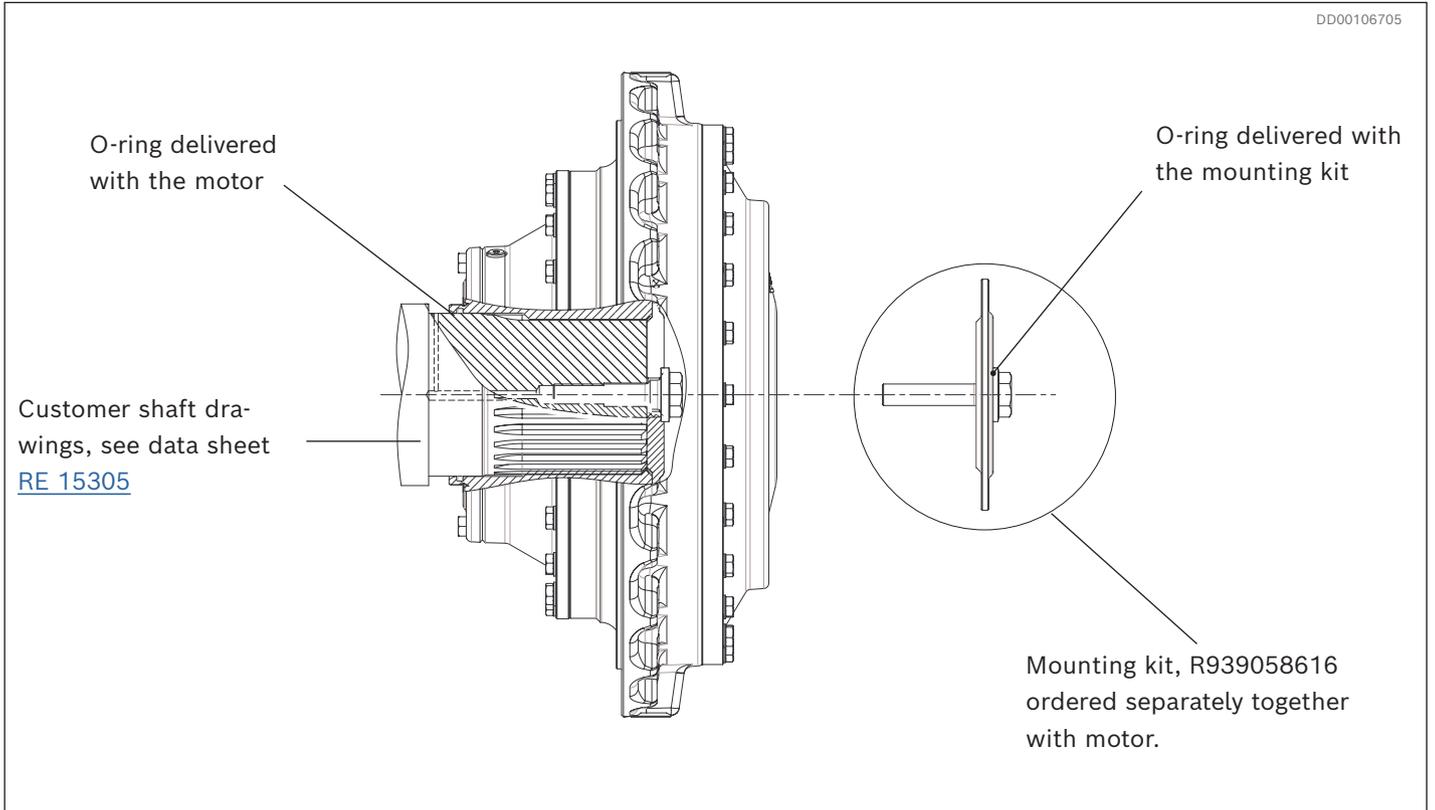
Example flange mounted CA motor with spline and MDA brake on customer shaft
